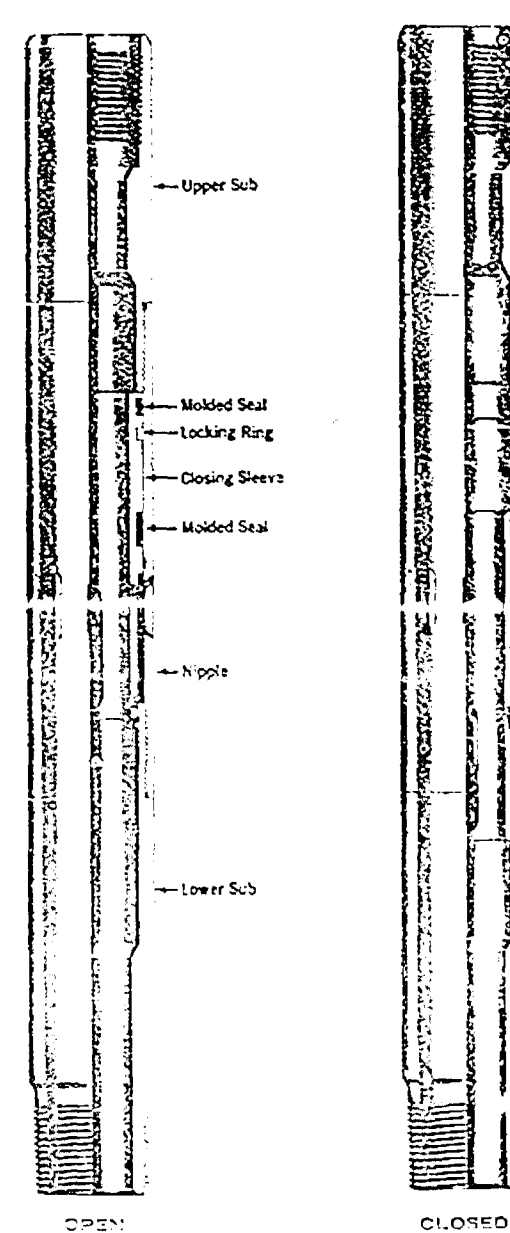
PSI TYPE "S" SLIDING SLEEVE Product No. 810-02
